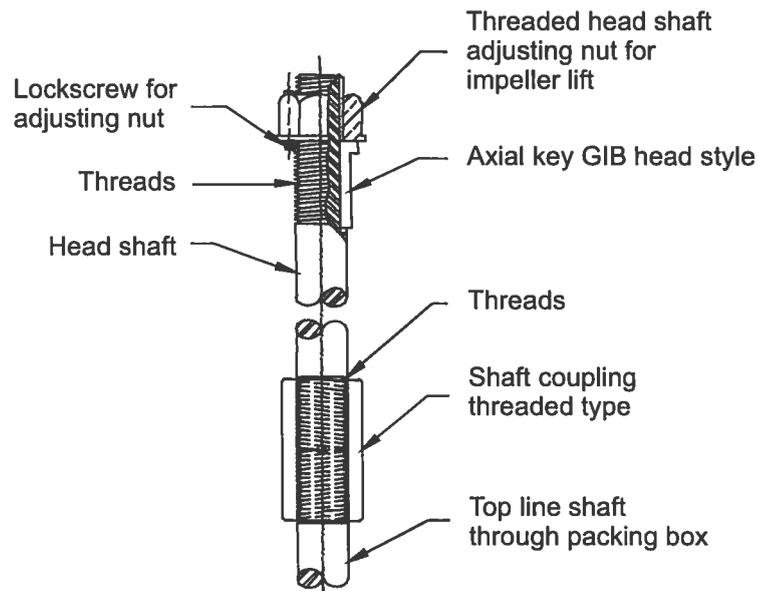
Head shaft coupling, rigid style, for hollow-shaft motor
